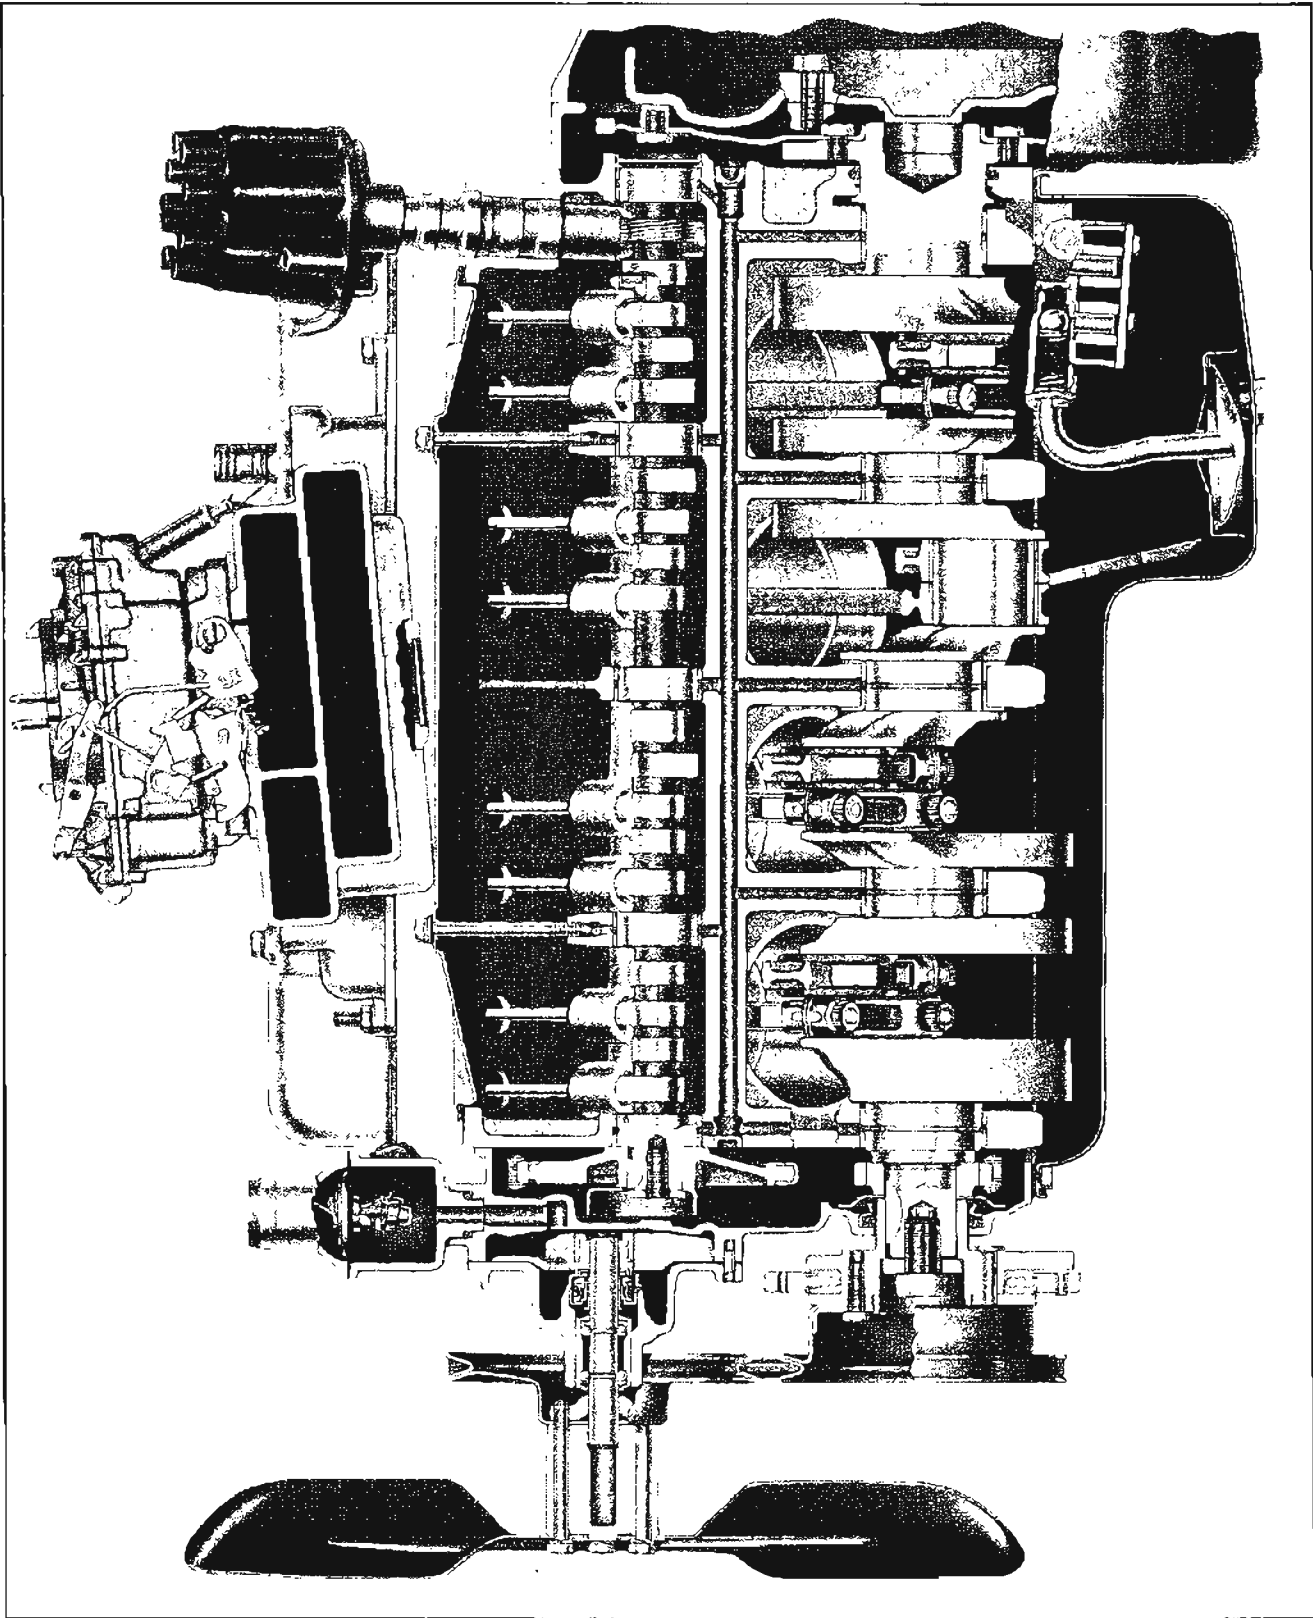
Gran Sport 400 Cu. In. Engine Cross Section (Side View)
